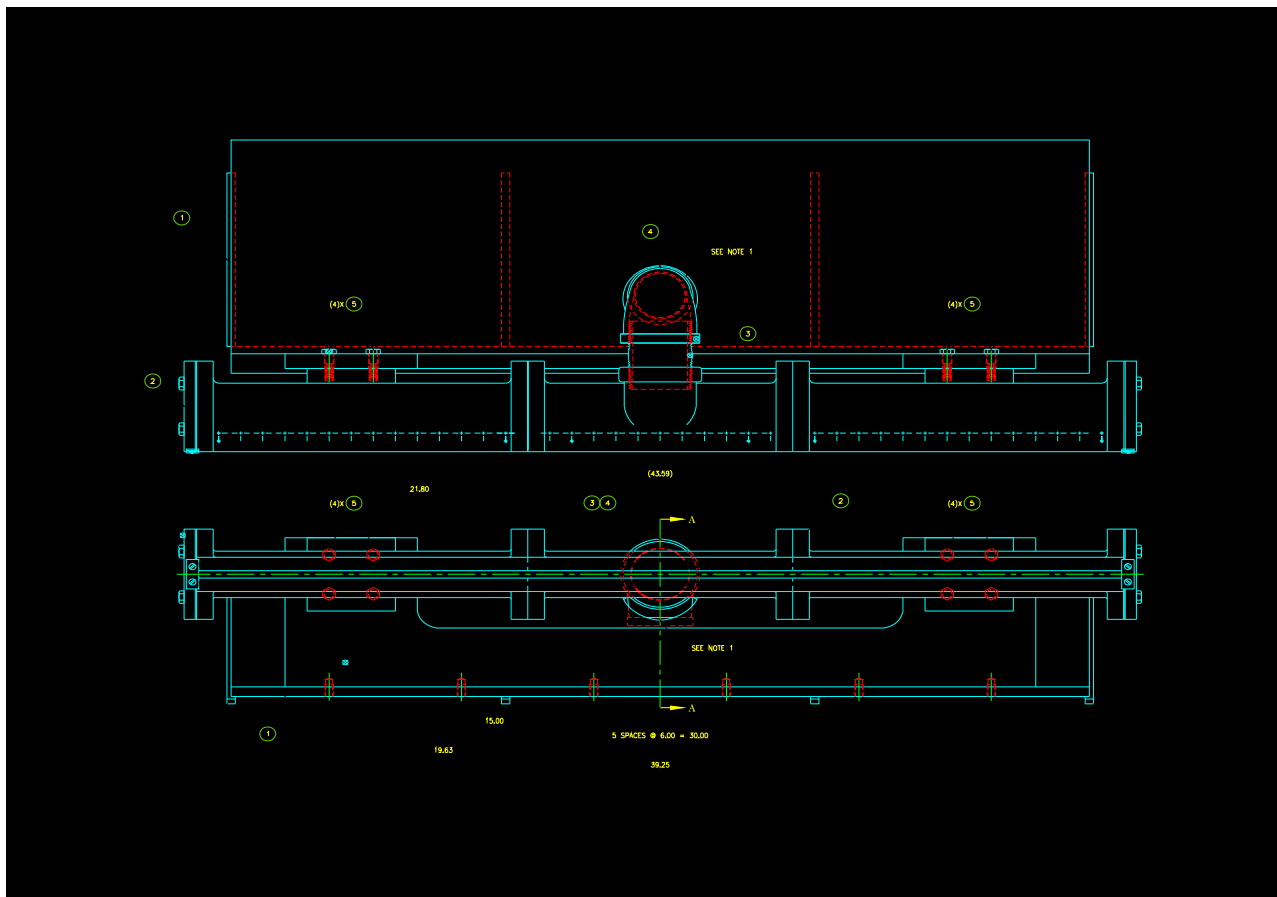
Combustion system (burner) and exhaust scoop assembly [DWG # A4096-00-0004D]
